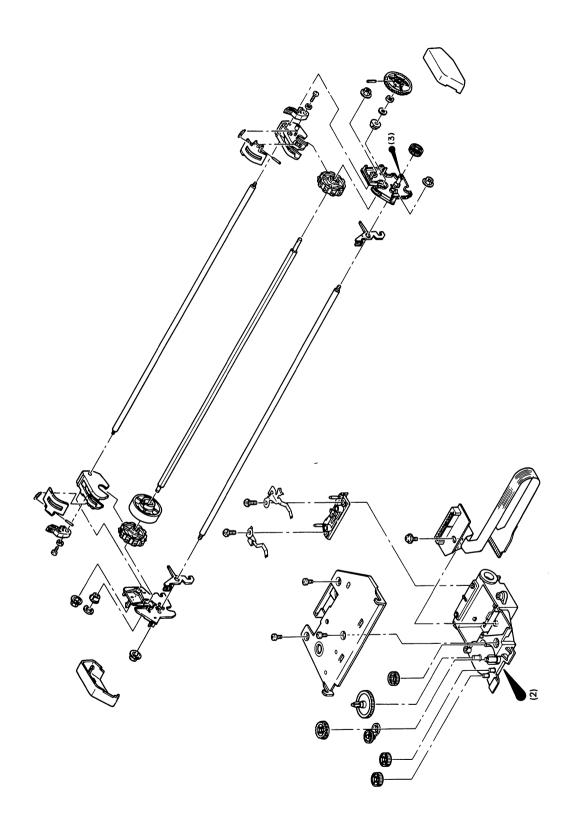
Lubrication and Adhesive Application Points Drawing 2
